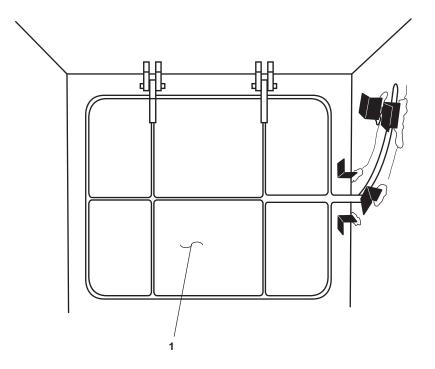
Main Engine Combustion Air Fire Flap Assembly
